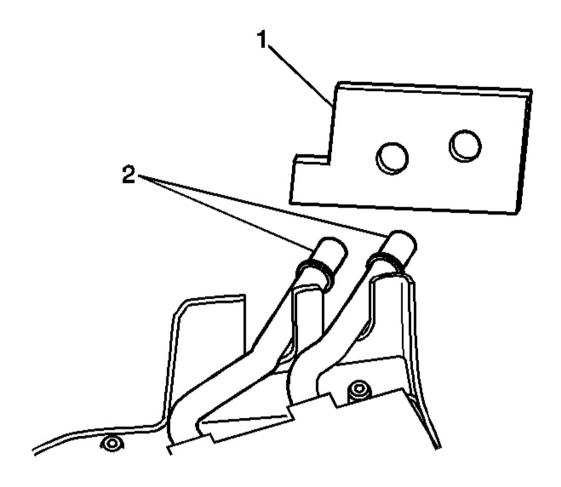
Heater Core Cowl Gasket & Heater Core Courtesy of GENERAL MOTORS CORP.
